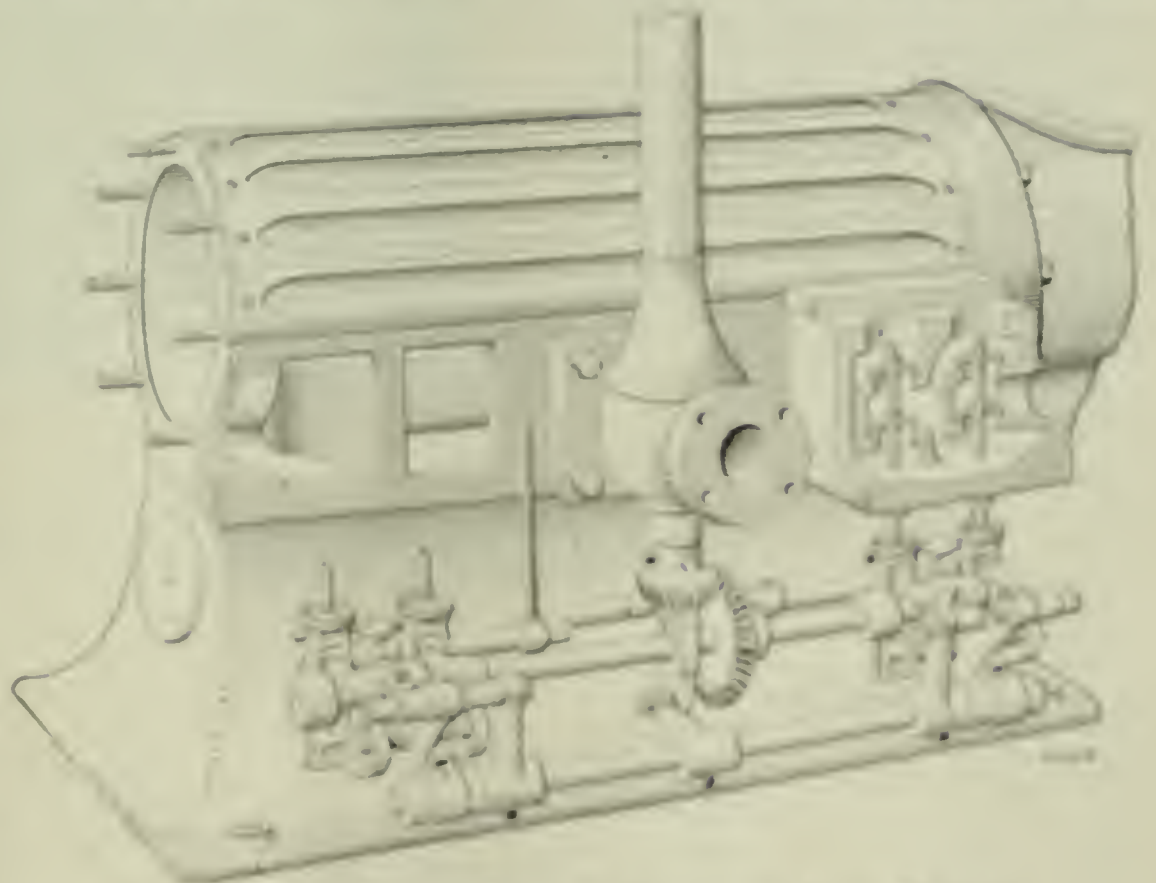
VIEW OF ENGINE SHOWING VALVES AND DYNAMO CONNECTION
